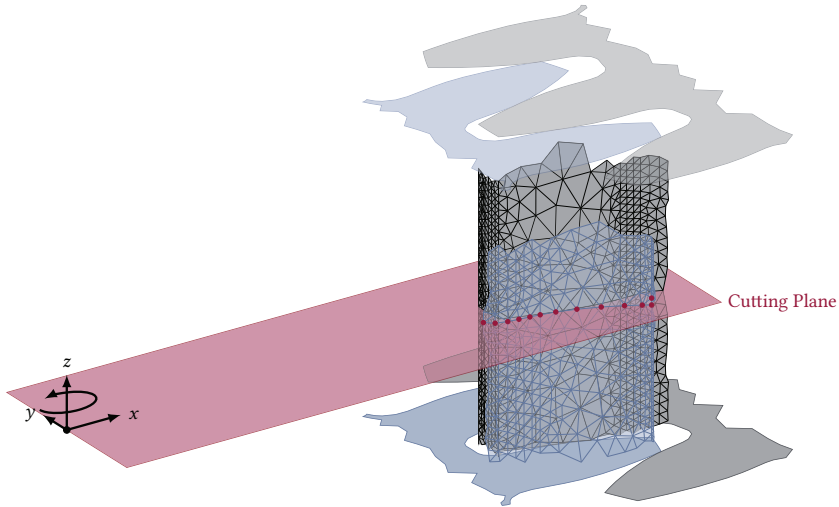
Intersection of the Driven Gear Surface Mesh
